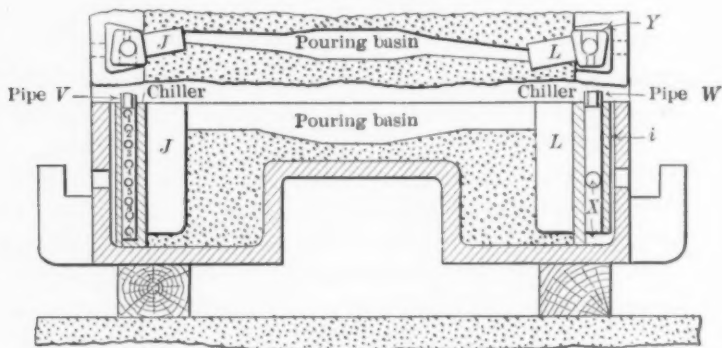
CHILLER MOLD FOR TESTING CHILLING EFFECT ON CASTINGS BY COOLING CHILLER
